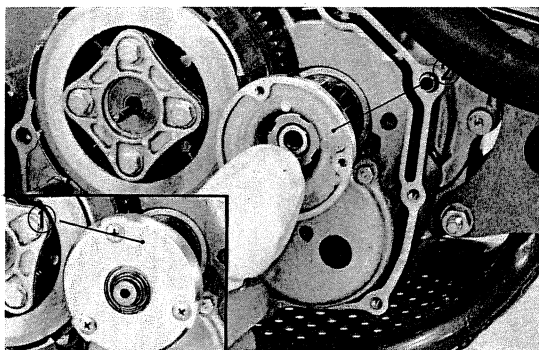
① Oil filter rotor cover ② Oil filter rotor
